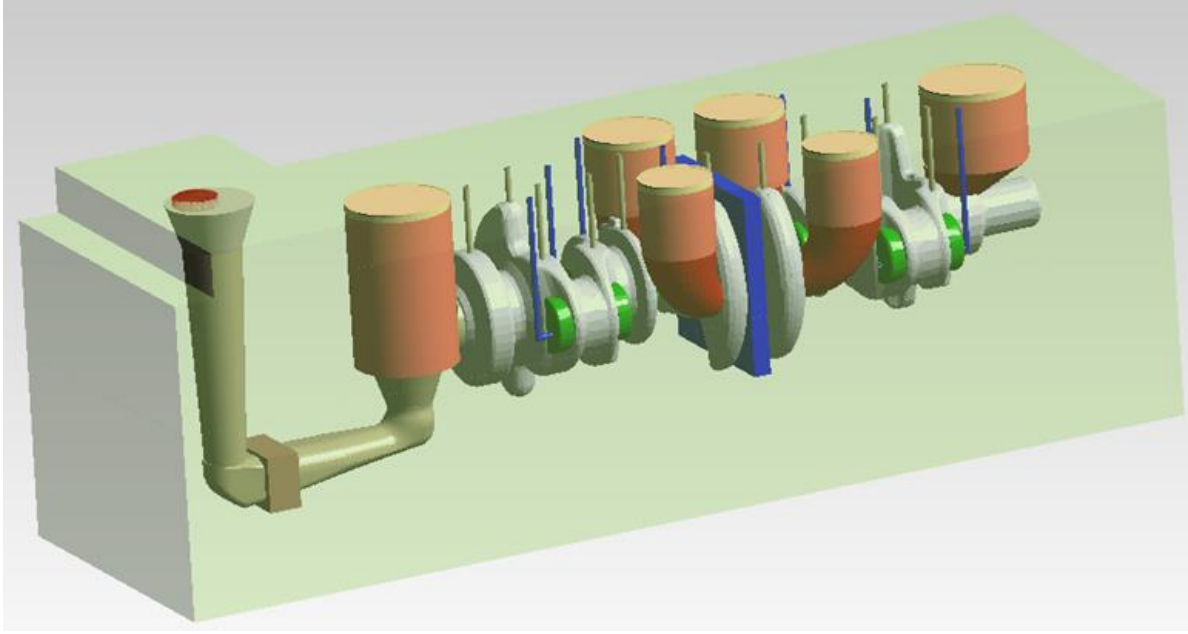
Simulation geometry of the prototype cast steel crankshaft.
